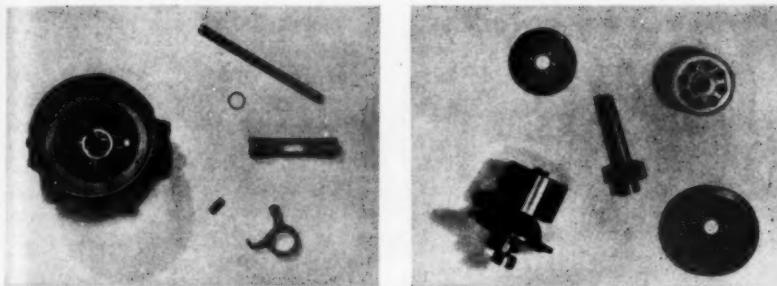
HERMETIC COMPRESSOR PARTS AND HERMETIC MOTOR PARTS
